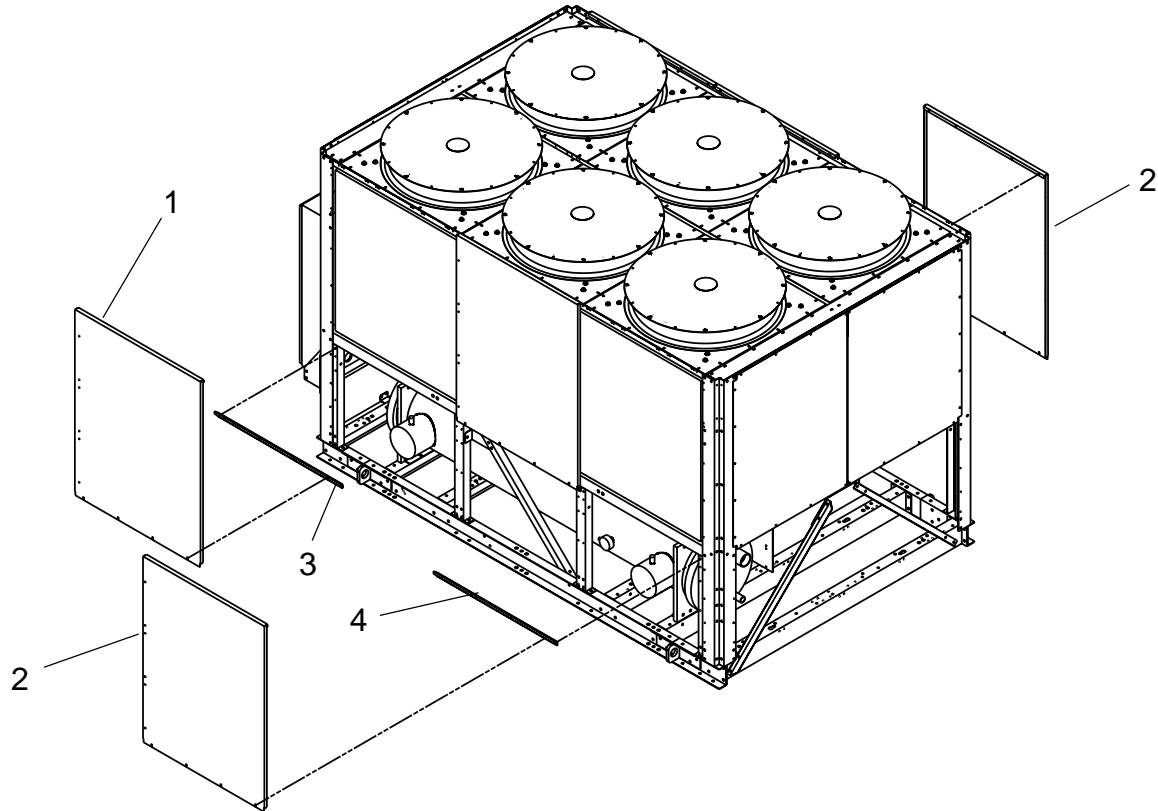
BOTTOM SECTION - WIRE ENCLOSURE - KIT NO. 375-29569-101 IS SHOWN.
